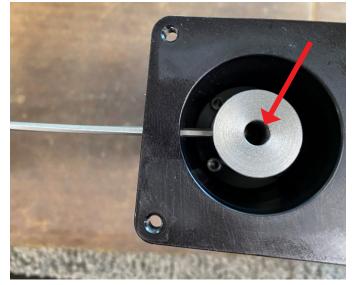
Another view of the Allen wrench through the motor mount access hole. The red arrow is pointing to the center hole of the coupling.
